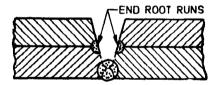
WELDING OF FLANGE PLATES AT A JUNCTION, SINGLE-VEE BUTT WELDS
